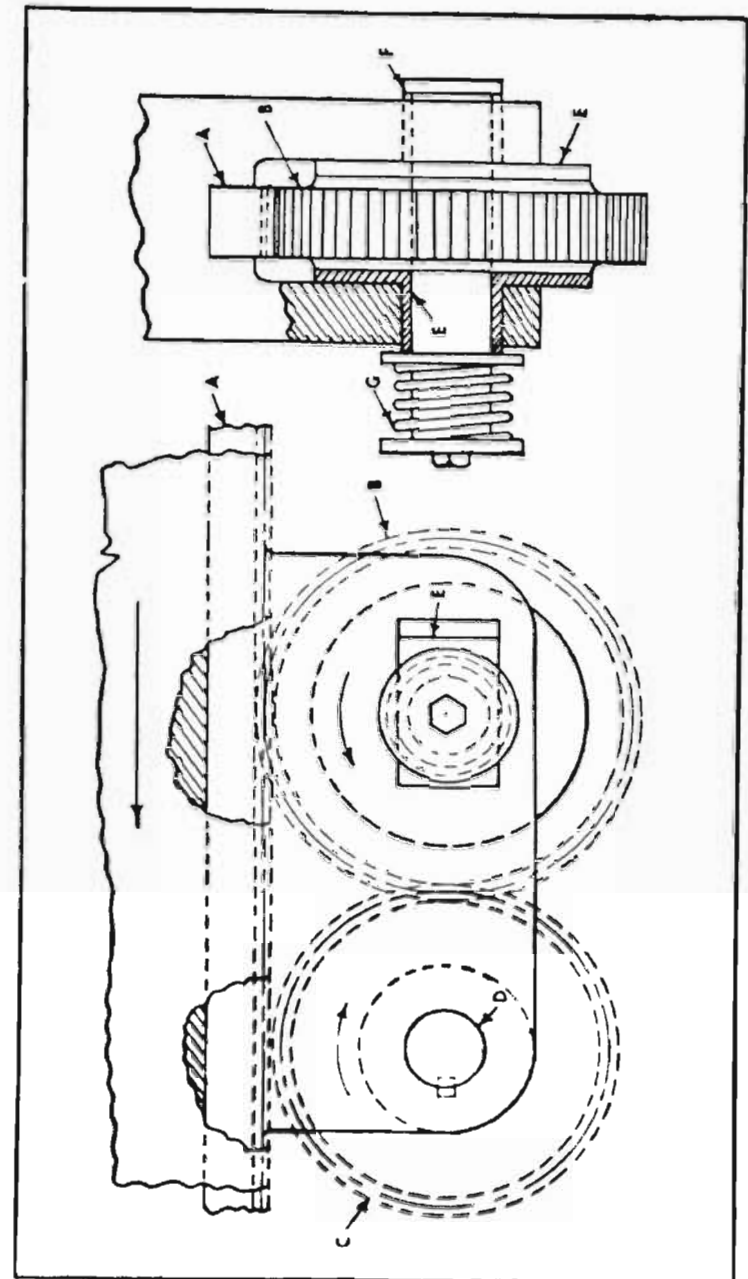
Rack and Gear Assembly that Provides Intermittent Rotary Motion in One Direction.
